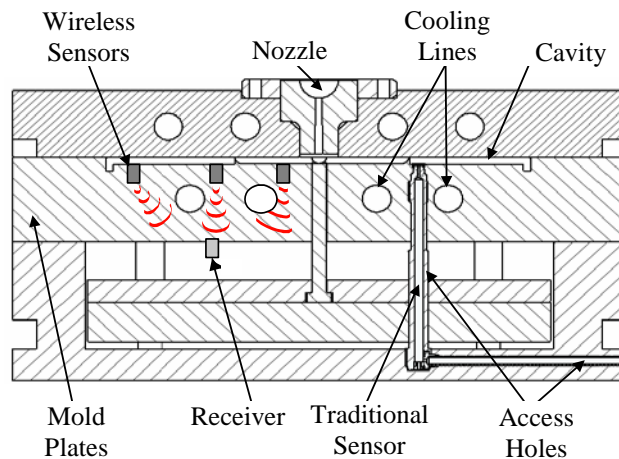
Injection mold instrumented with the wireless sensor system (left) and a traditional wired sensor (right)
